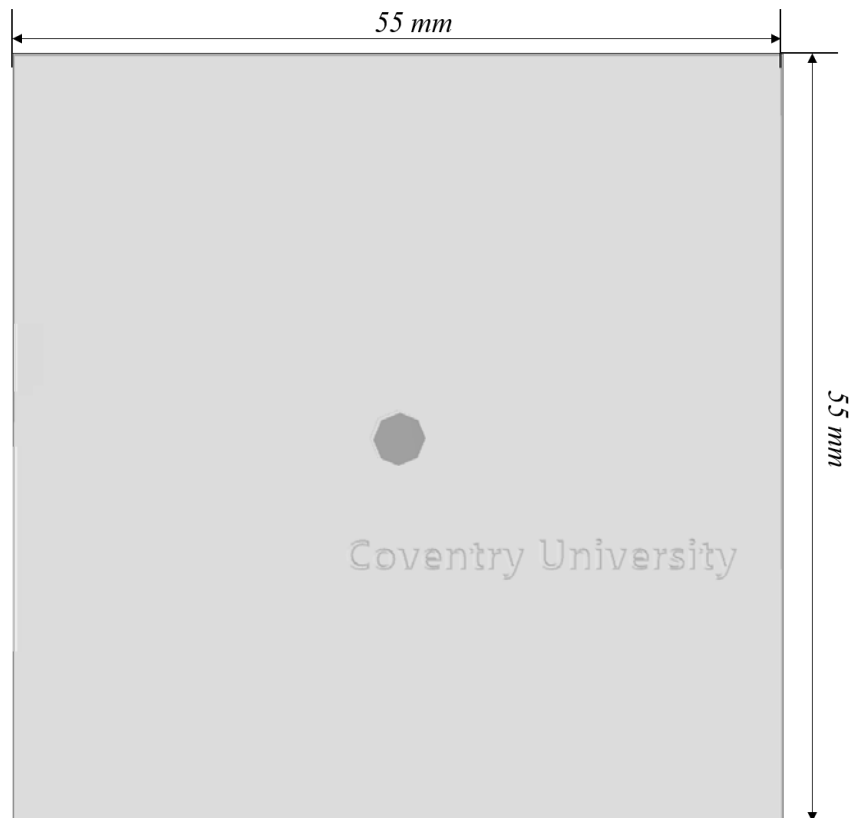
Flux sensor outer dimensions (coil reel)
